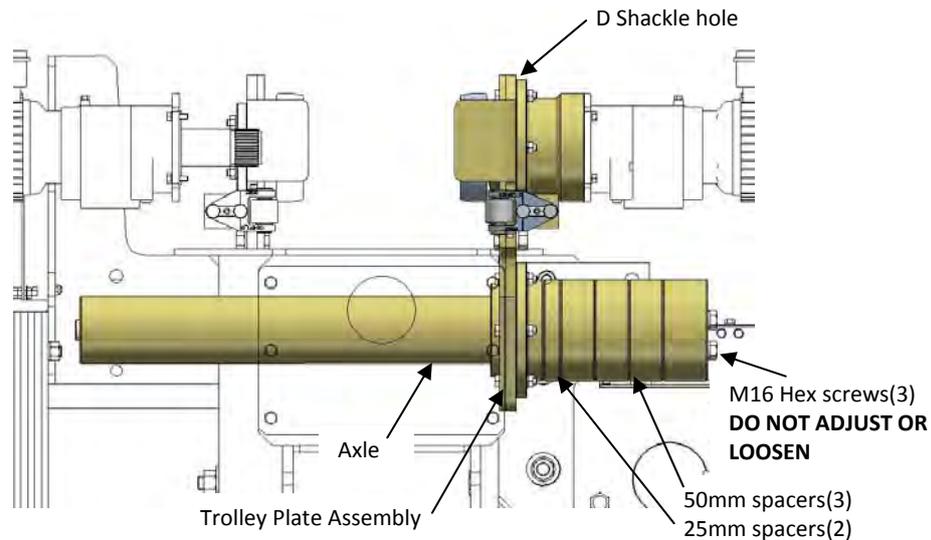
CT Trolley Plate Assembly- Hoist Panel side
